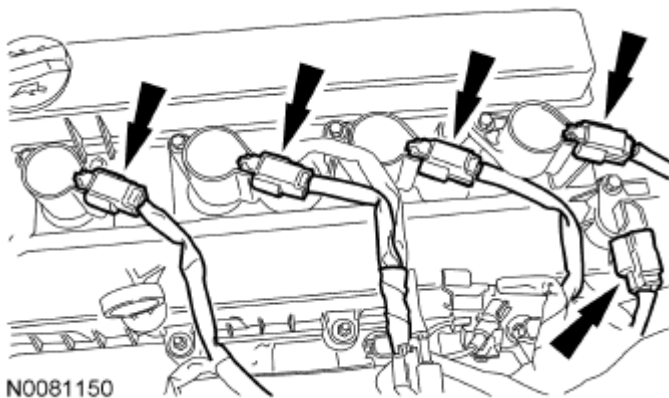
Locating Ignition Coil-On-Plugs & Camshaft Position Sensor Electrical Connectors
